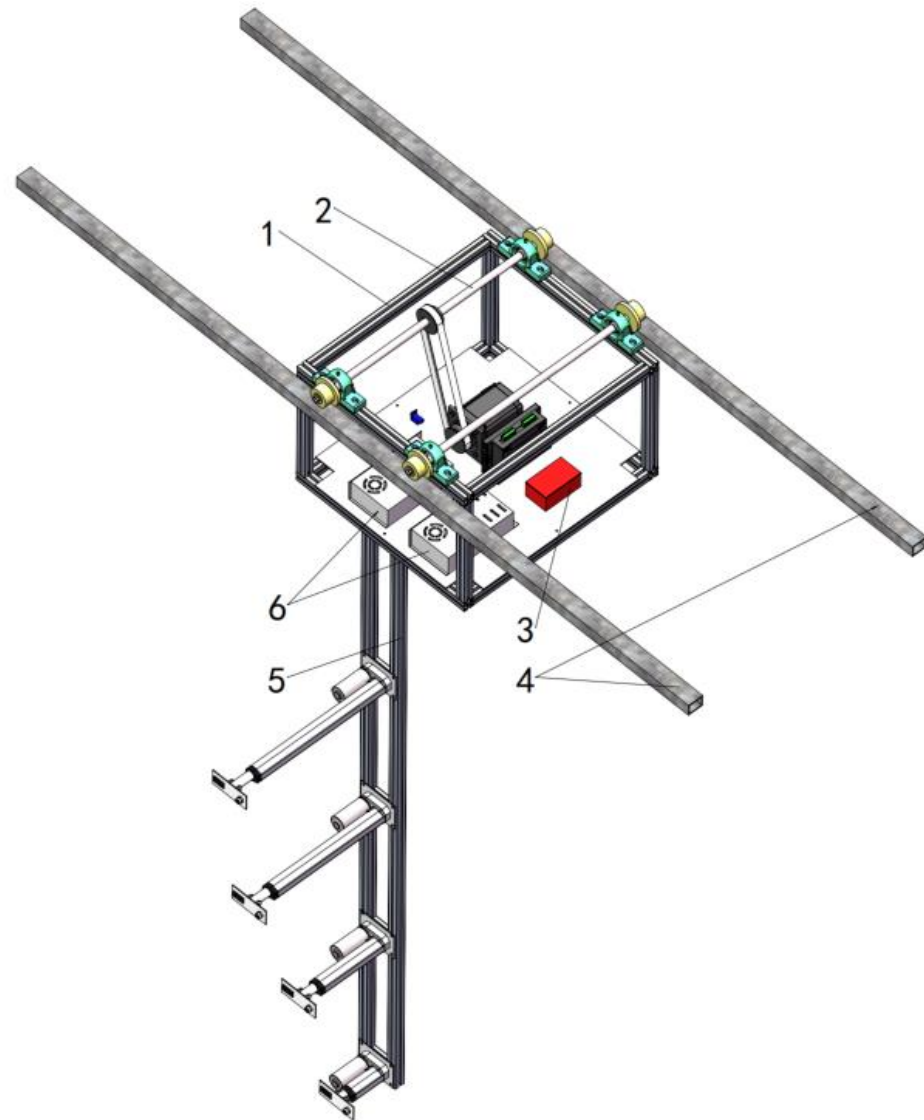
Schematic diagram of the spraying machine. 1. Mounting frame; 2. Self-propelled system; 3. Control box; 4. Guide rail; 5. Spraying arm; 6. Power supply system.
